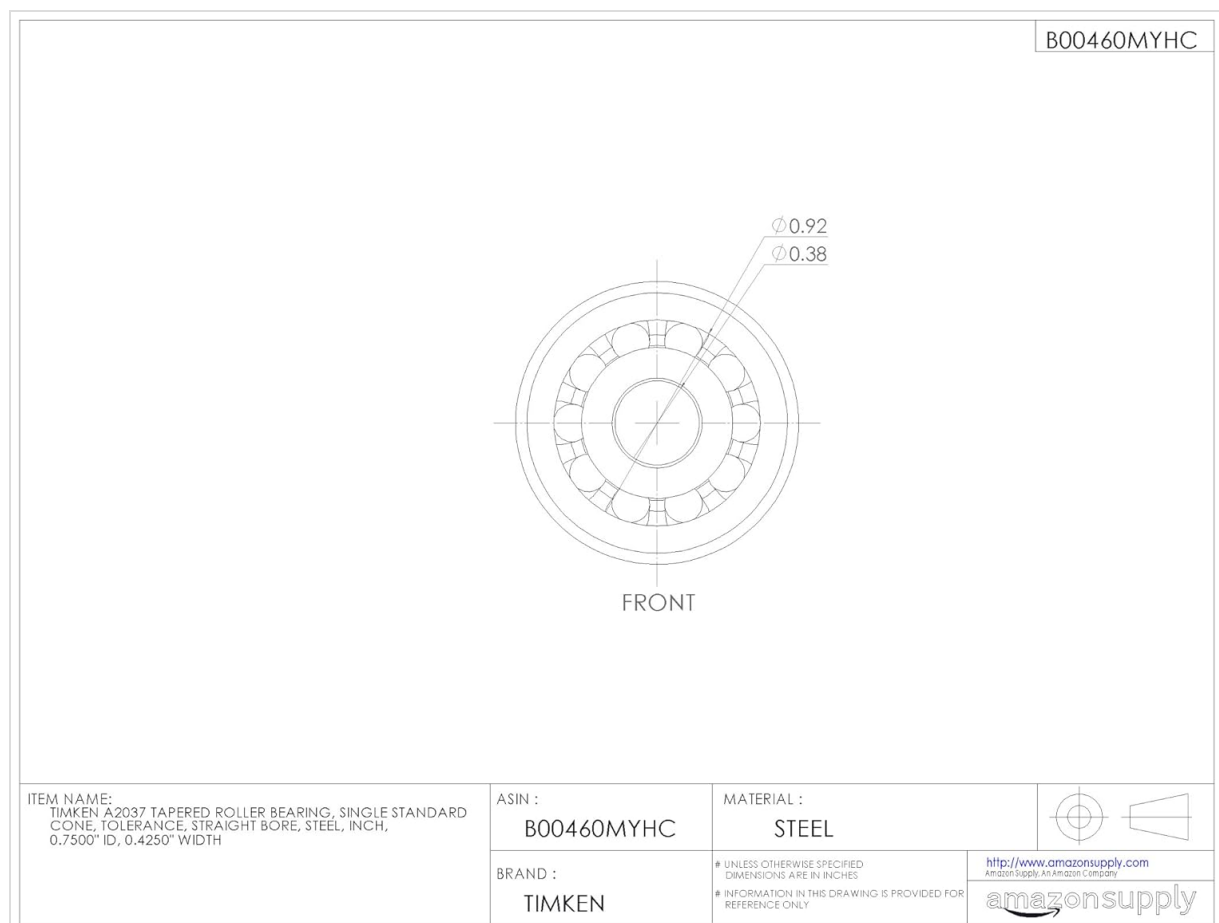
Front view technical drawing of the Timken A2037 Tapered Roller Bearing Cone, showing internal dimensions and structure.
